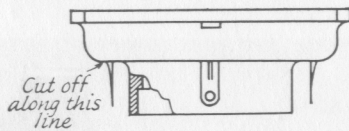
Sketch showing how the lower portion of the tube socket is cut off.
